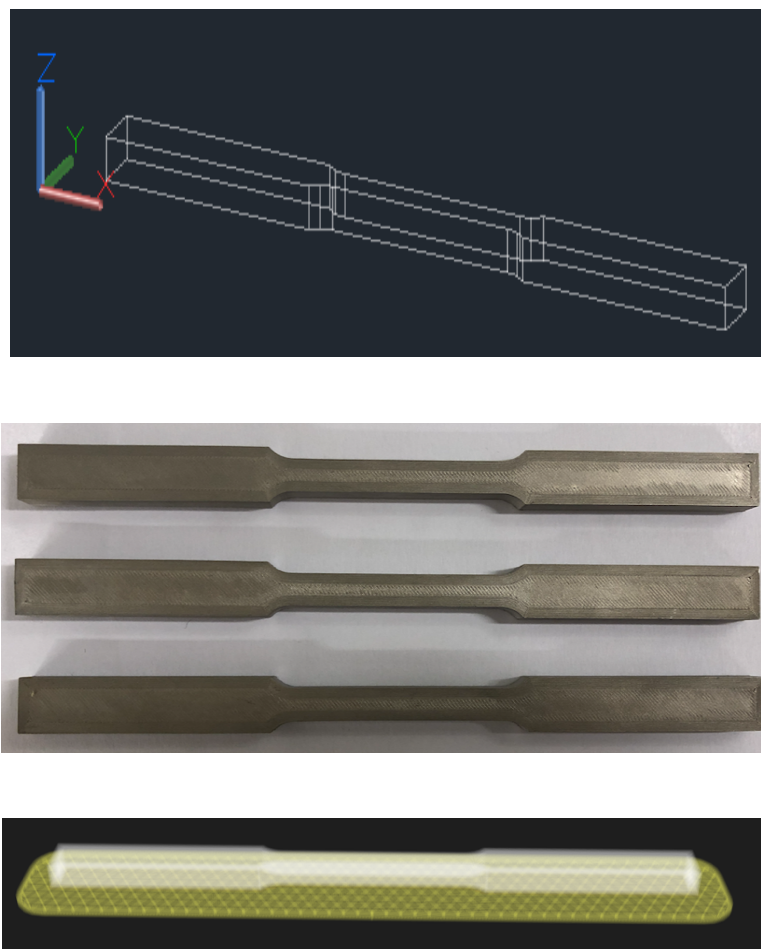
BMD tensile testing sample manufactured at the XY-flat building orientation.
